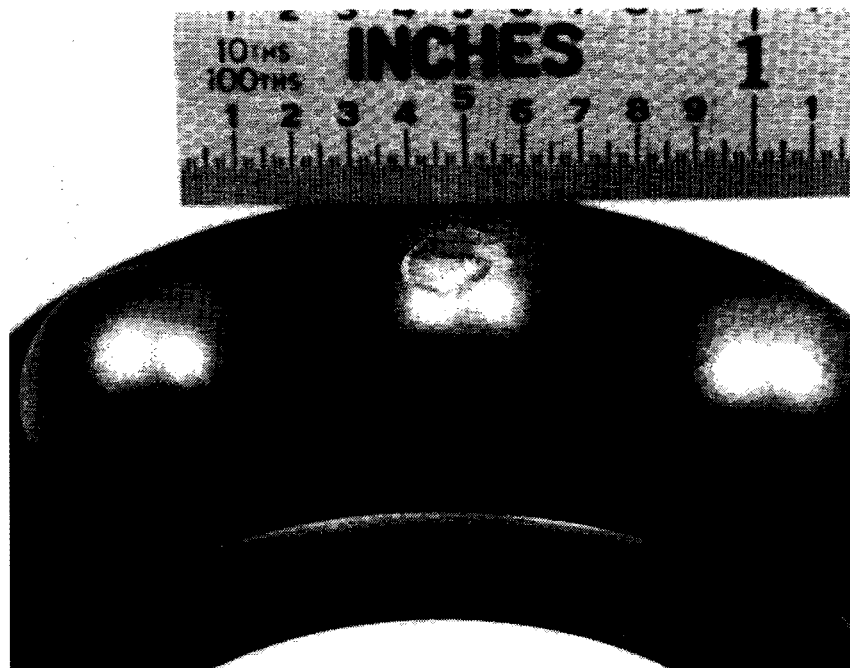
42-Degree Gearbox -143 Bearing Ball Defect C/D,
